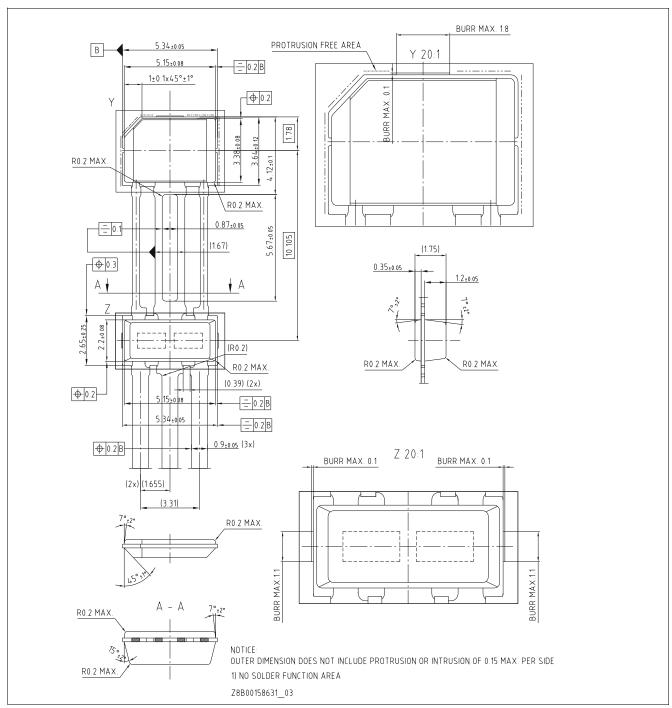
PG-SSO-3-52 (Plastic Green Single Slim Outline), Package Dimensions
